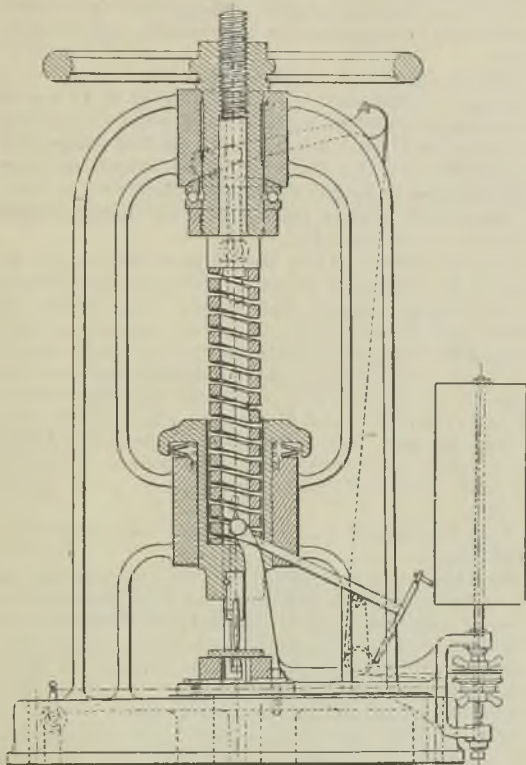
SECTION THROUGH FREMONT'S TRANSVERSE TESTING MACHINE FOR SMALL SAMPLES.
